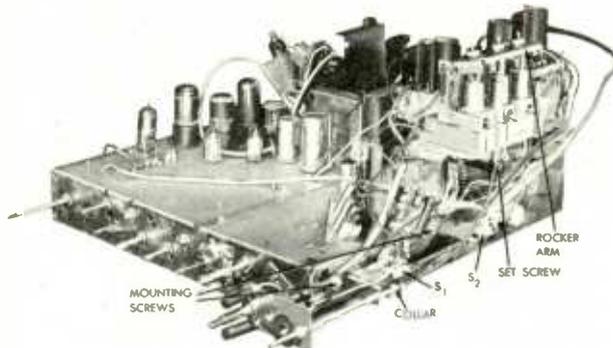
Chassis View of Zenith L2593H Showing UHF Tuning Assembly.
